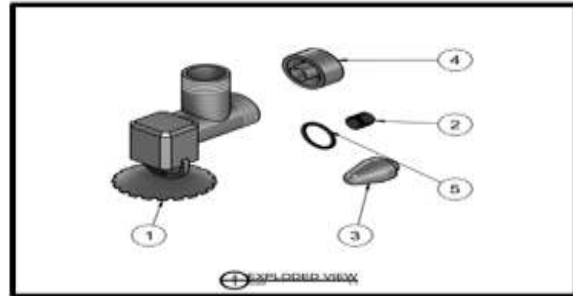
Exploded View Horizontal Design of Innovative SMA Fire Sprinkler Assembly
